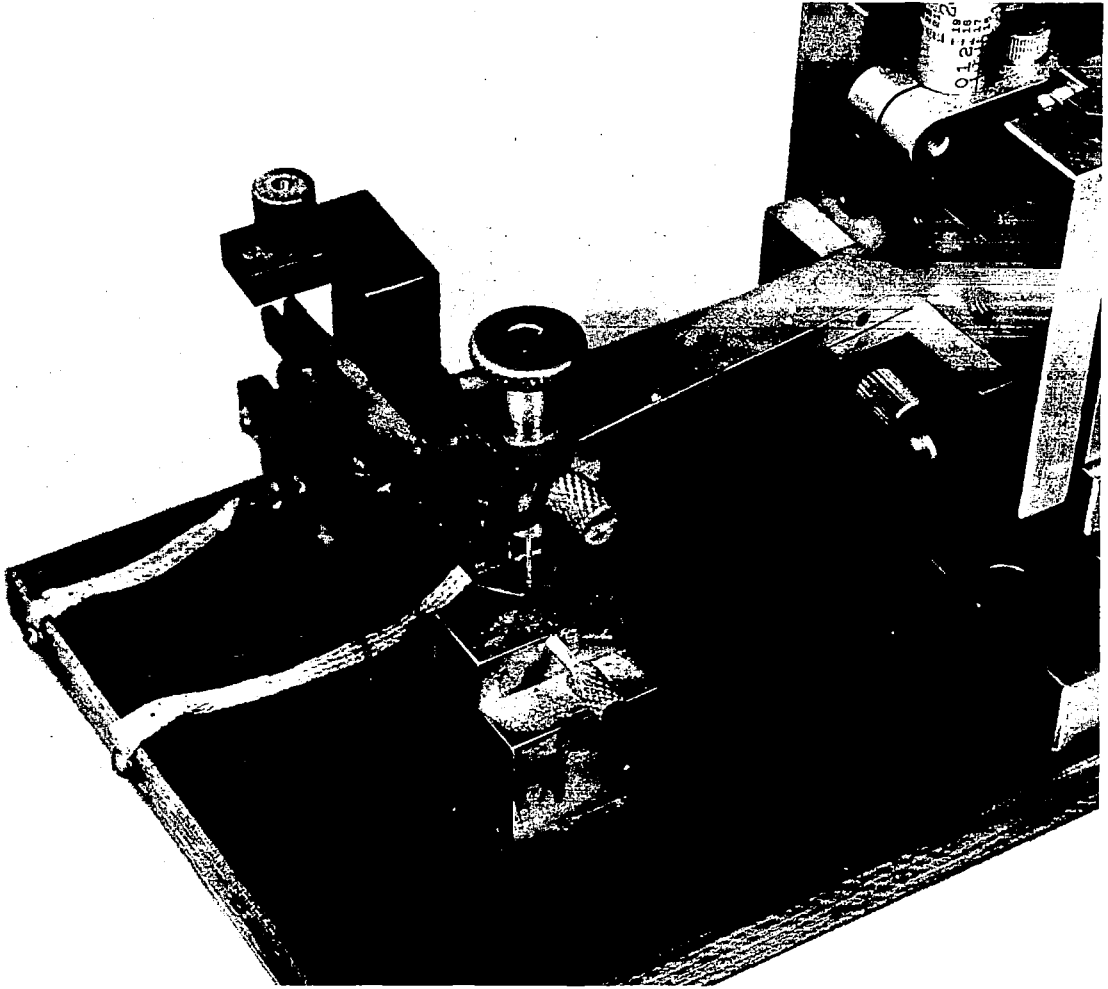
Soldering Jig with Pressure Foot in Place over Ceramic Ring
